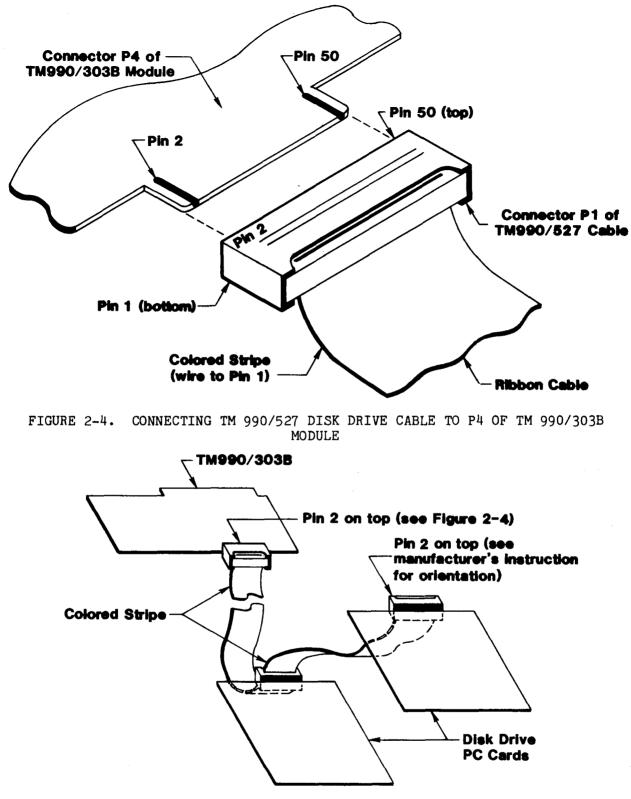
TM 990/527 CABLING BETWEEN CONTROLLER AND EIGHT-INCH DRIVES
